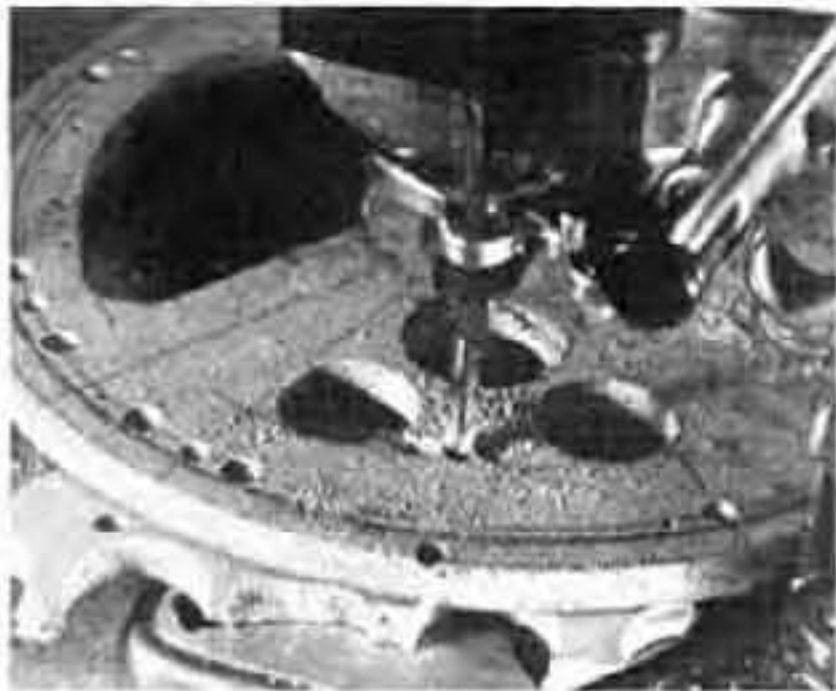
A SERIES OF SMALL HOLES can be drilled to rough-cut bulkheads to shape.
